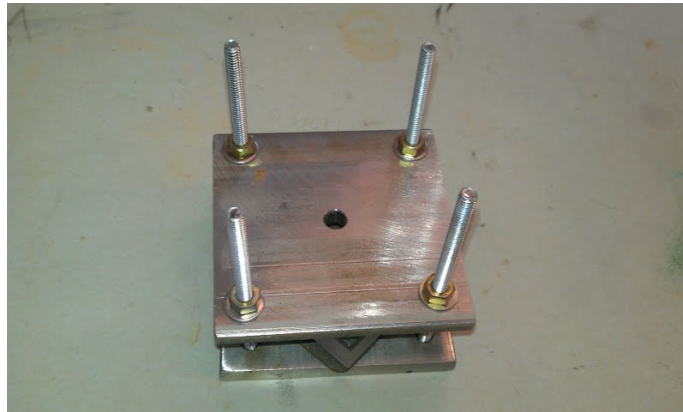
This is a picture of the fully assembled jig, with the hole on top where acid is added and removed visible
